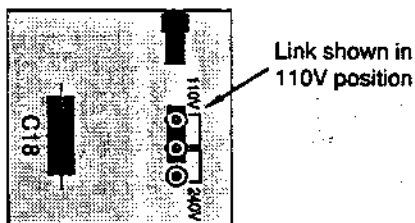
110VAC or 240VAC Input Settings (HFC Chassis only)
